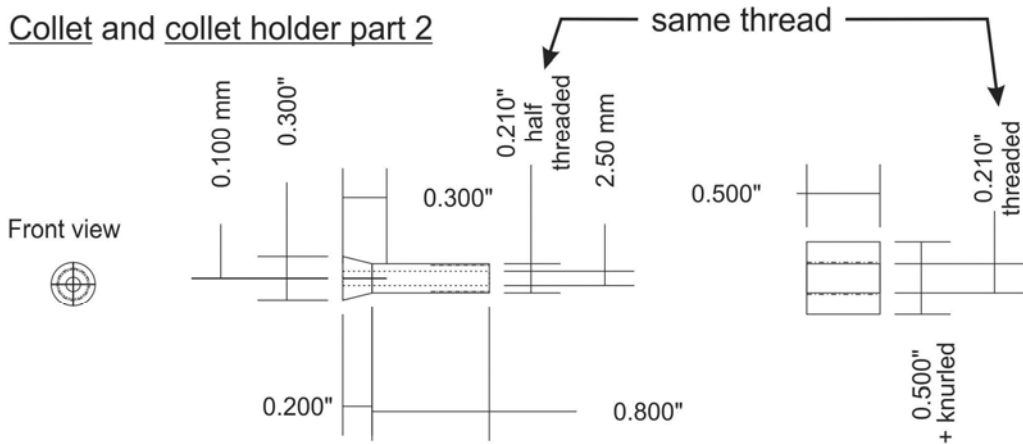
Collet and part 2 of collet holder. The collet slips over the ferrule from the back. By tightening the collet holder part 2, the collet is pulled into the collet holder, which tightens the collet onto the ferrule.
